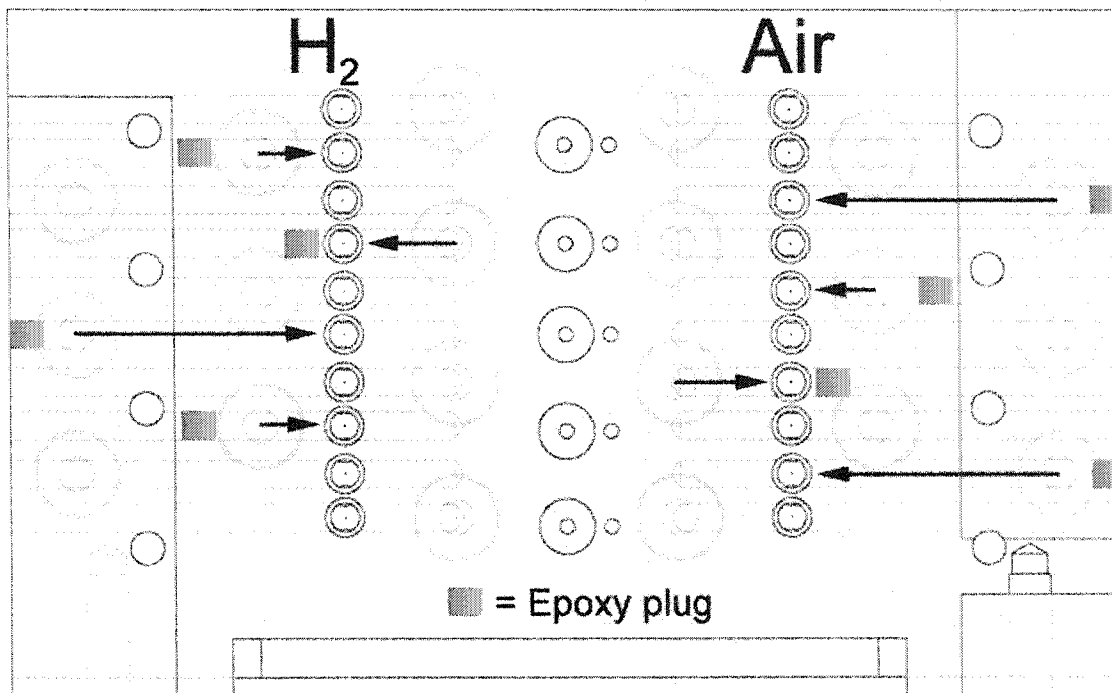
The inlet manifold plate directed the reactants from the fitting perforations (at the back) to the appropriate O-ring seals facing the stack (i.e., the flow would be perpendicular to the page and directed toward the reader). The perforations on the left and right sides were sealed with epoxy plugs at varying depths. The sealing and flow re-direction for the remaining (water) inlets are not shown. The outlet manifold had identical and symmetrical sealing schemes.
